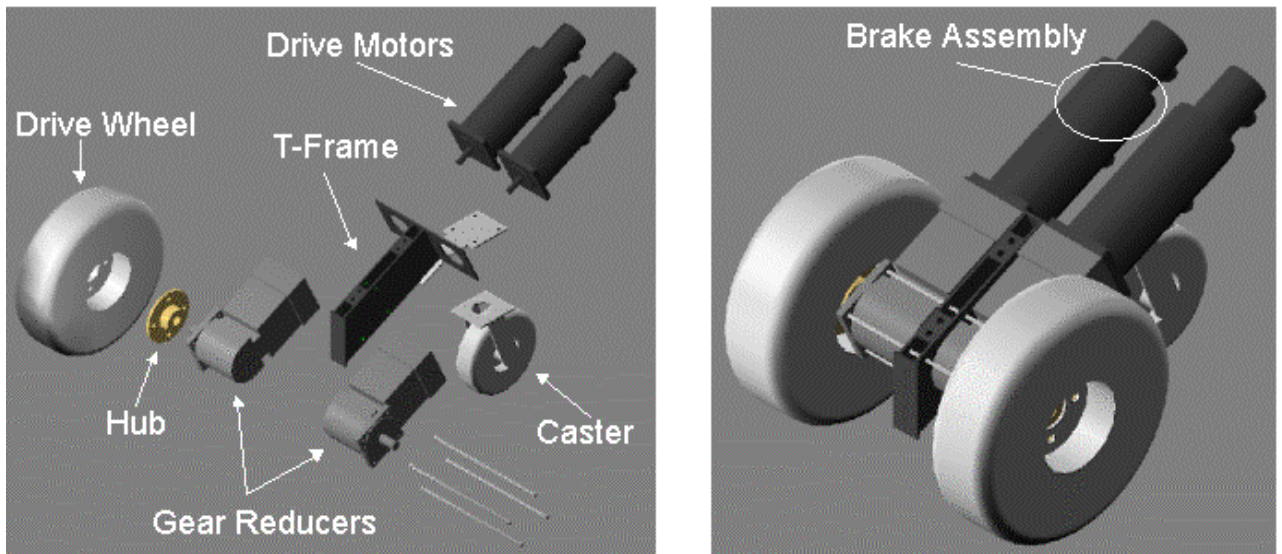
NEVEL's Base Vehicle: Exploded and Final Assembly
